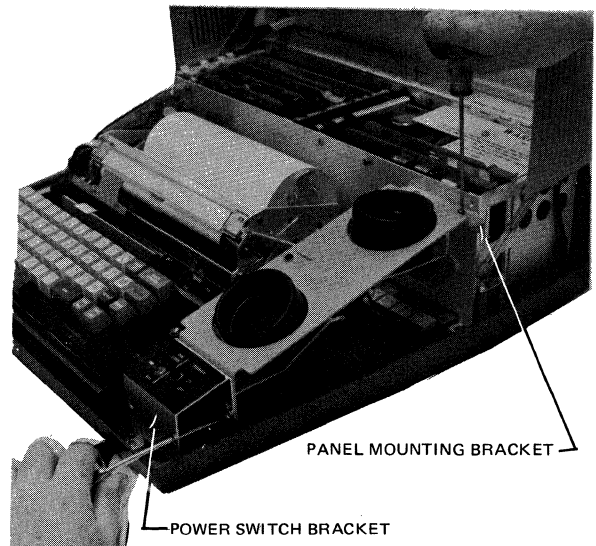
INSTALLING THE ACOUSTIC COUPLER PANEL
